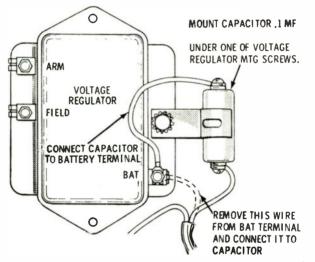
This drawing shows how the capacitor is mounted on the voltage regulator. (Motorola Consumer Products, Inc.)
